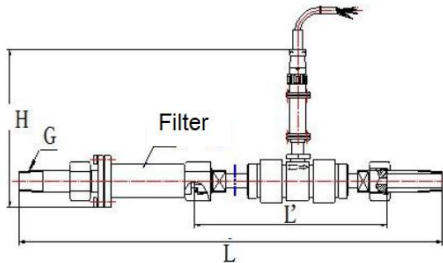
DN4~DN10 threaded connection flowmeter structure and installation dimensions
